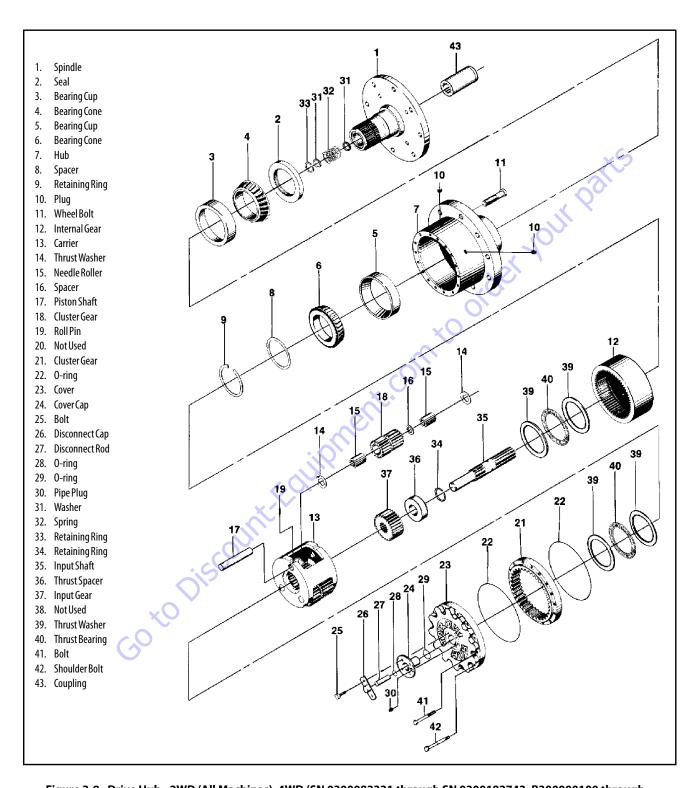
Drive Hub - 2WD (All Machines), 4WD (SN 0300083331 through SN 0300182743, B300000100 through B300001091)
